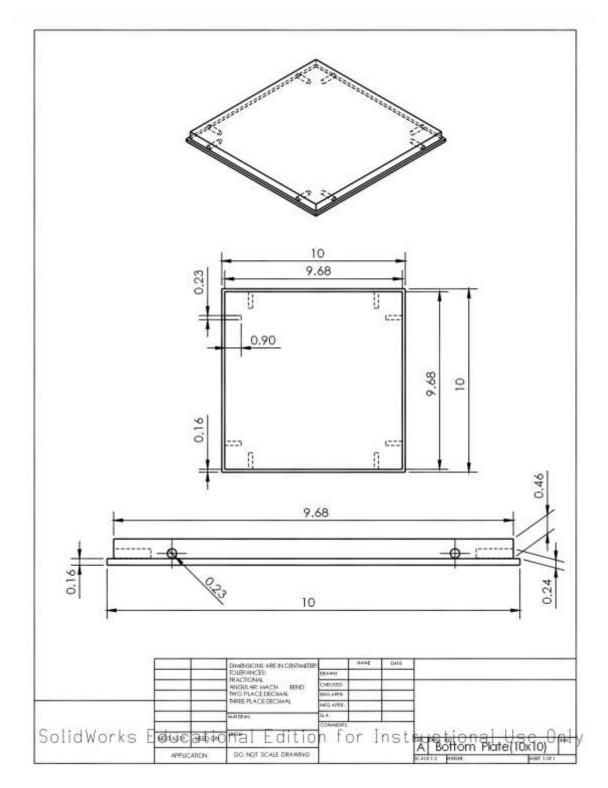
Mechanical drawing of bottom plate of HAXDT structure with dimensions in centimeters. This plate attaches to the HASP mounting plate (Fig. A1).
